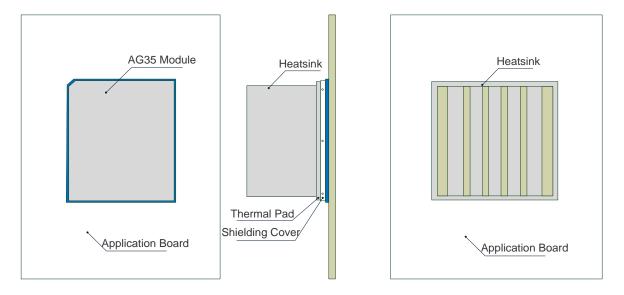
Referenced Heatsink Design (Heatsink at the Top of the Module)
